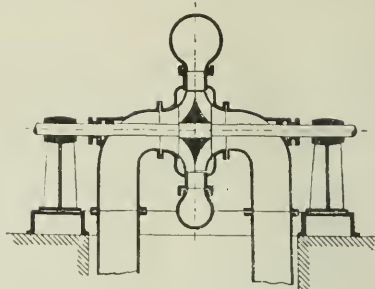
DOUBLE SPIRAL TURBINE WITH TWO DRAFT TUBES.
